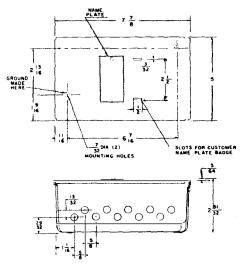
Dimensions of Types MC-63 and MC-65 phase-shifting transformers.
